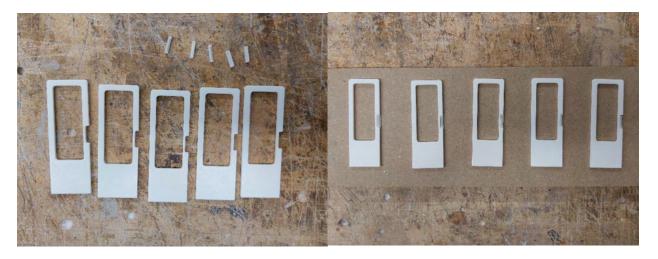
3D-printed door pieces (left), 3D-printed door pieces assembled (right).
